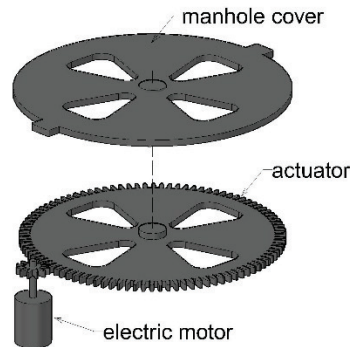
The prototype of an adjustable inlet gully for round lid stormwater manholes (Publication III).
